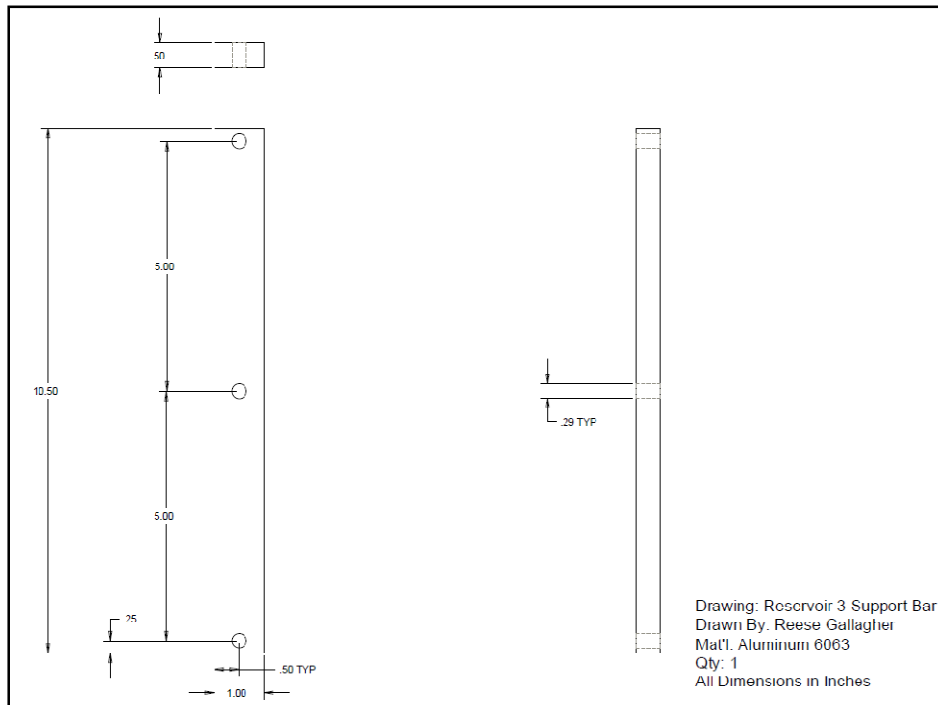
Reservoir 3 Support Bar Dimensional Drawing
